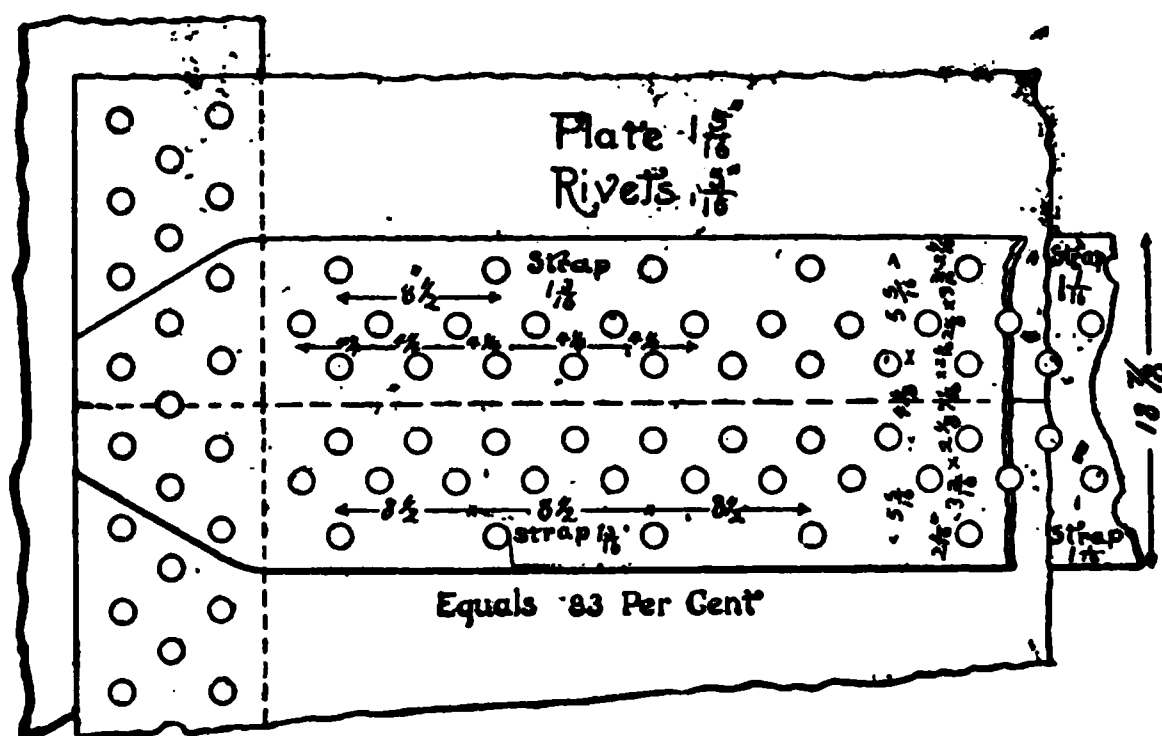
IMPROVED COMPOUND TRIPLE-RIVETED DOUBLE STRAP JOINT.
